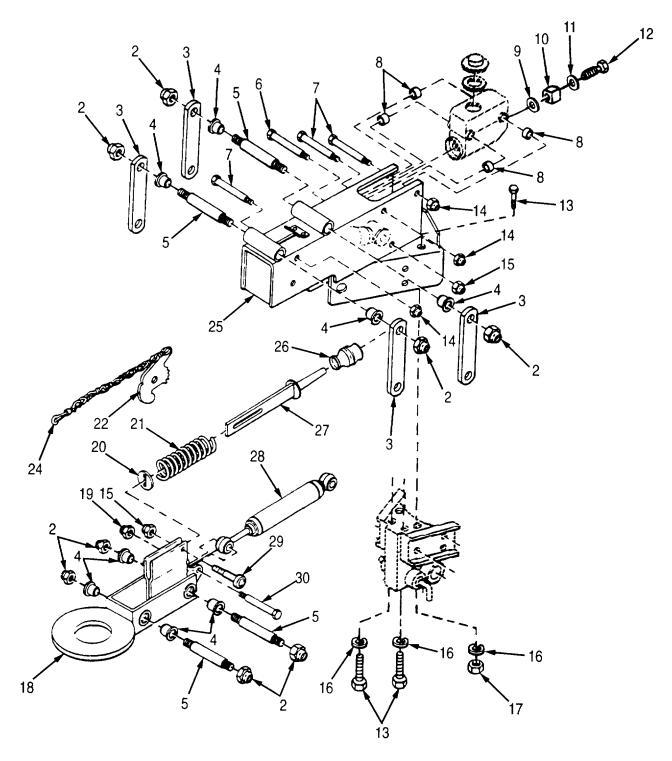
Hydraulic Brake Actuator Assembly, Surge (Sheet 1 of 2)
